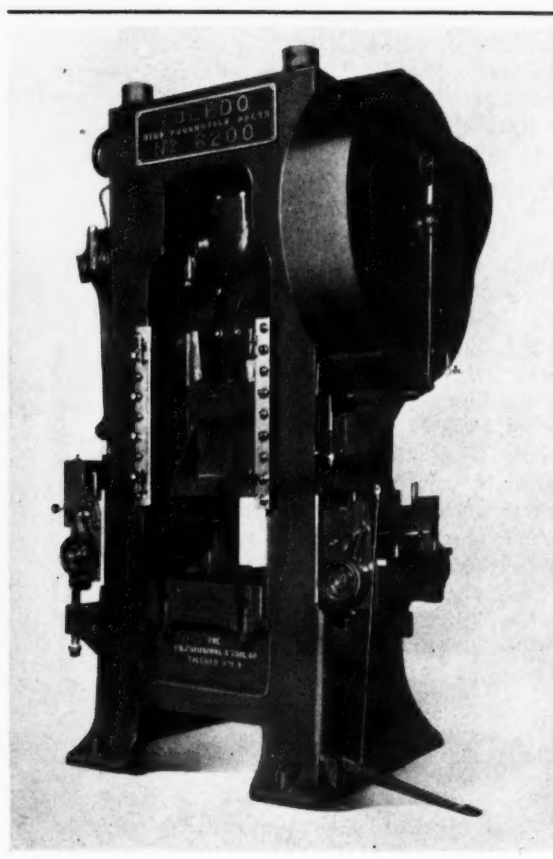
Single-crank Press for Performing Heavy Blanking and Coining Operations on Small Work
